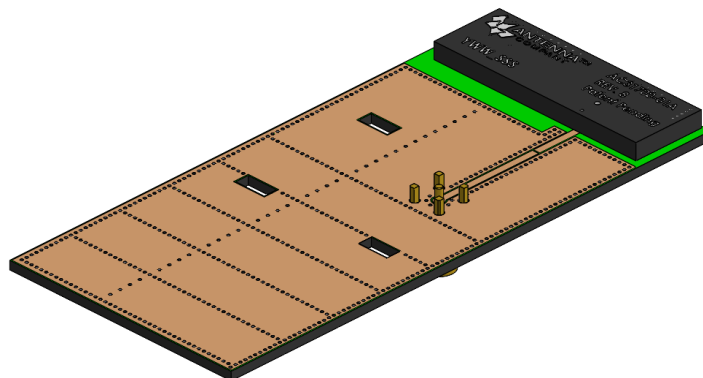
Isometric view of the AC31700-01A placement on the host PCB
